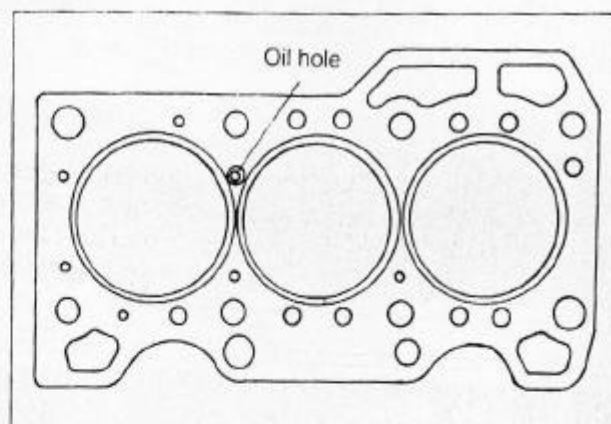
A - 73 INSTALLATION OF CYLINDER HEAD GASKET
